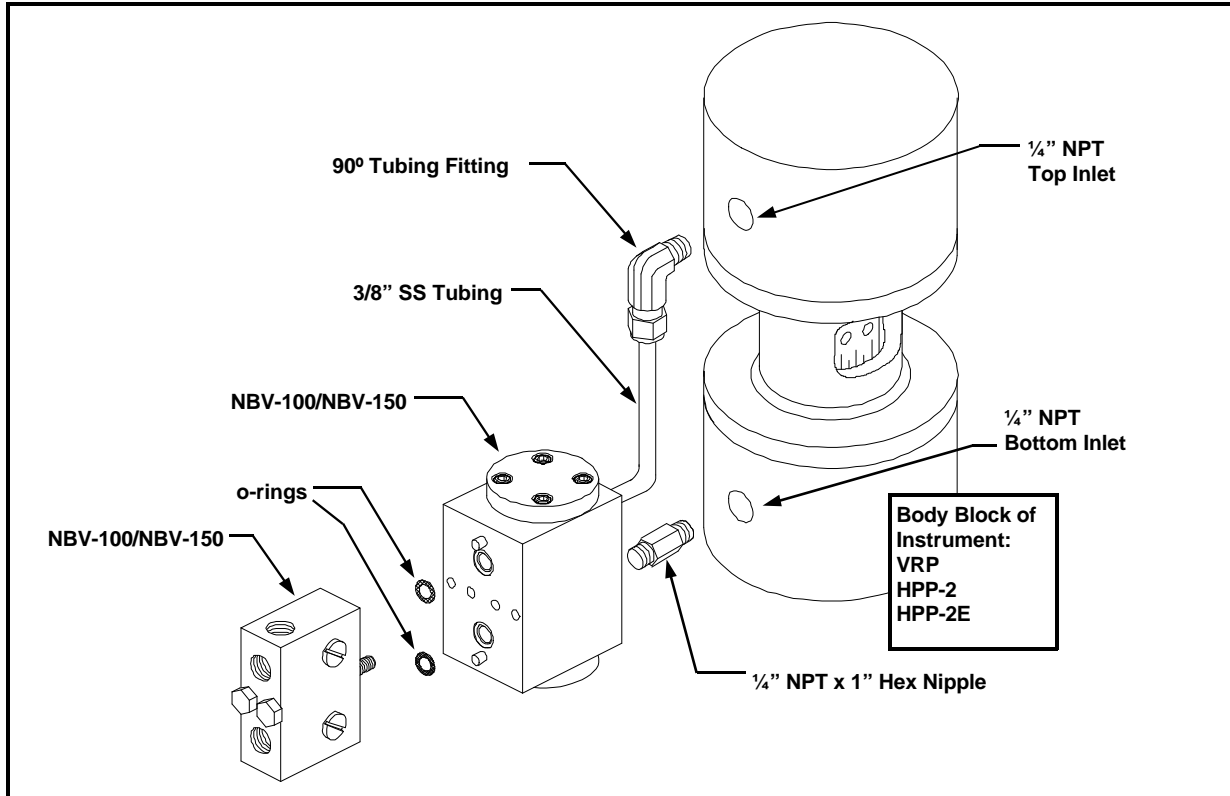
NBV Assembly on VRP, HPP-2, HPP-2E
